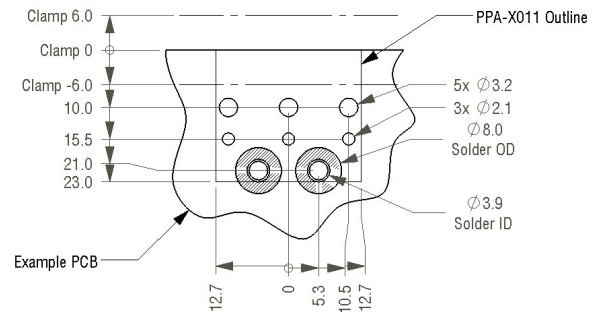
Example PCB configuration for directly mounting and connecting a PPA product to a PCB. Dimensions are shown as millimeters.
